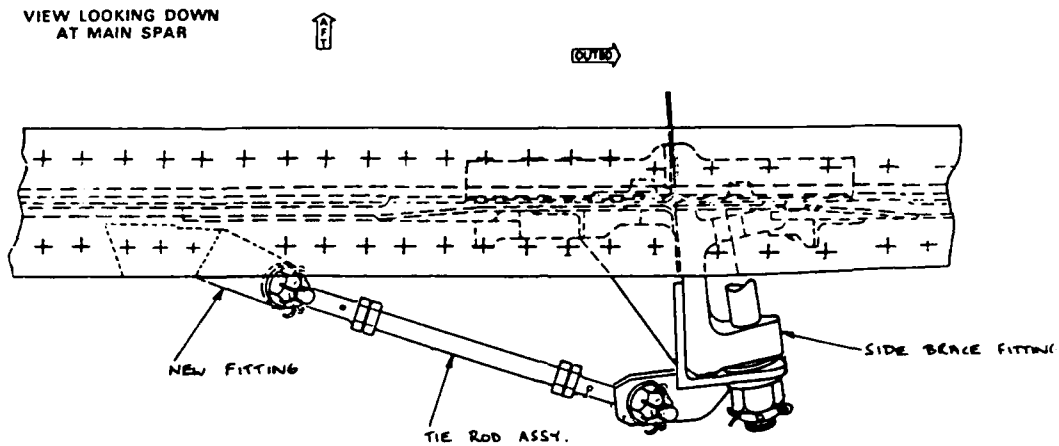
GULFSTREAM 112/114 SIDE BRACE FITTING STABILISER
